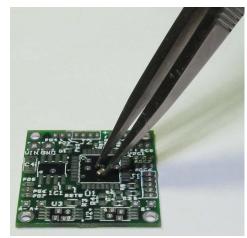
Fine tipped tweezers are necessary for soldering small parts.
